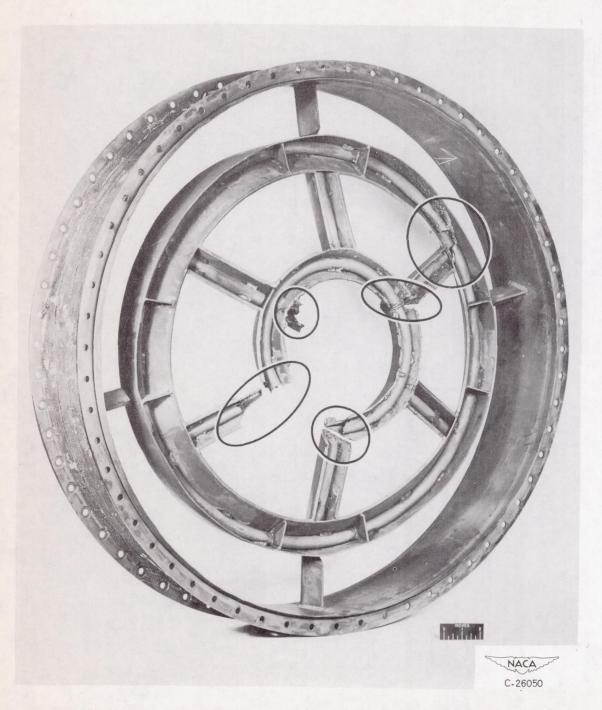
Typical V-gutter failure at gutter intersections and in sheltered region.
